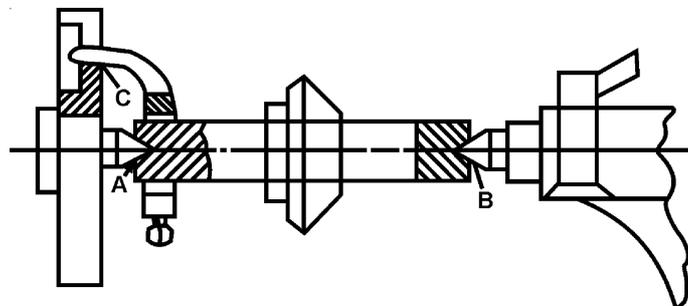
, Incorrect setup, Lathe dog tail is bearing on bottom of drive-plate slot, throwing work off center.
